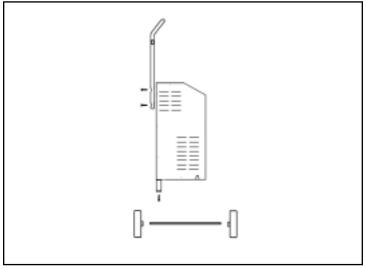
Assembly Diagram—Power Cord and Cables Not Shown
